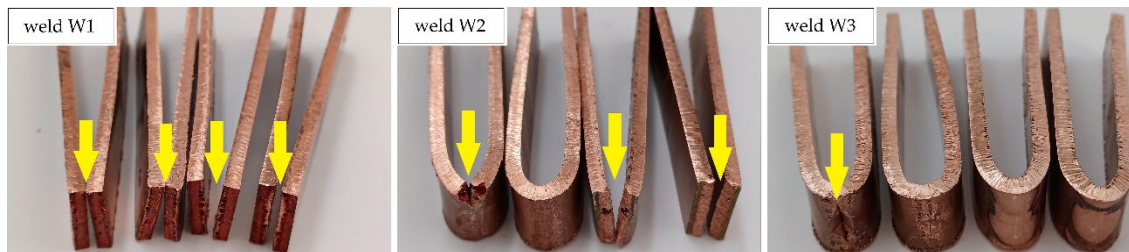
Specimens sectioned from welds W1, W2 and W3 after transverse bend test.
